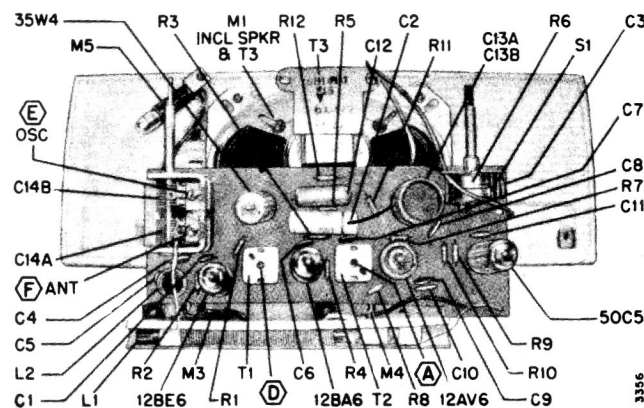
Top View of 5D4X Chassis Showing Location of Components and Alignment Points.
